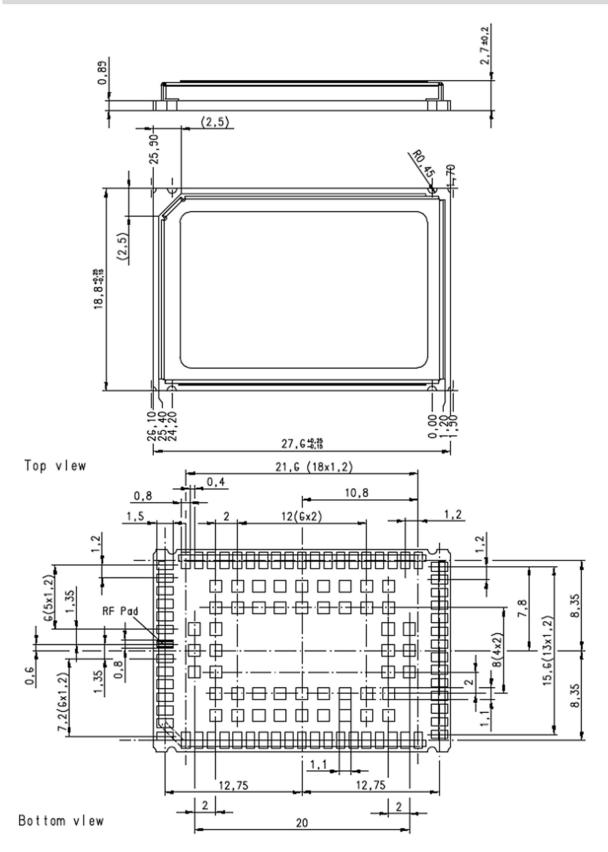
Dimensions of BGS12 (all dimensions in mm)
